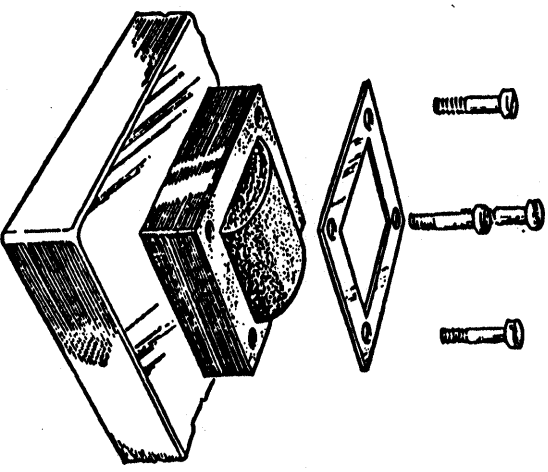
A method of clamping the finished transformer to the amplifier chassis.
